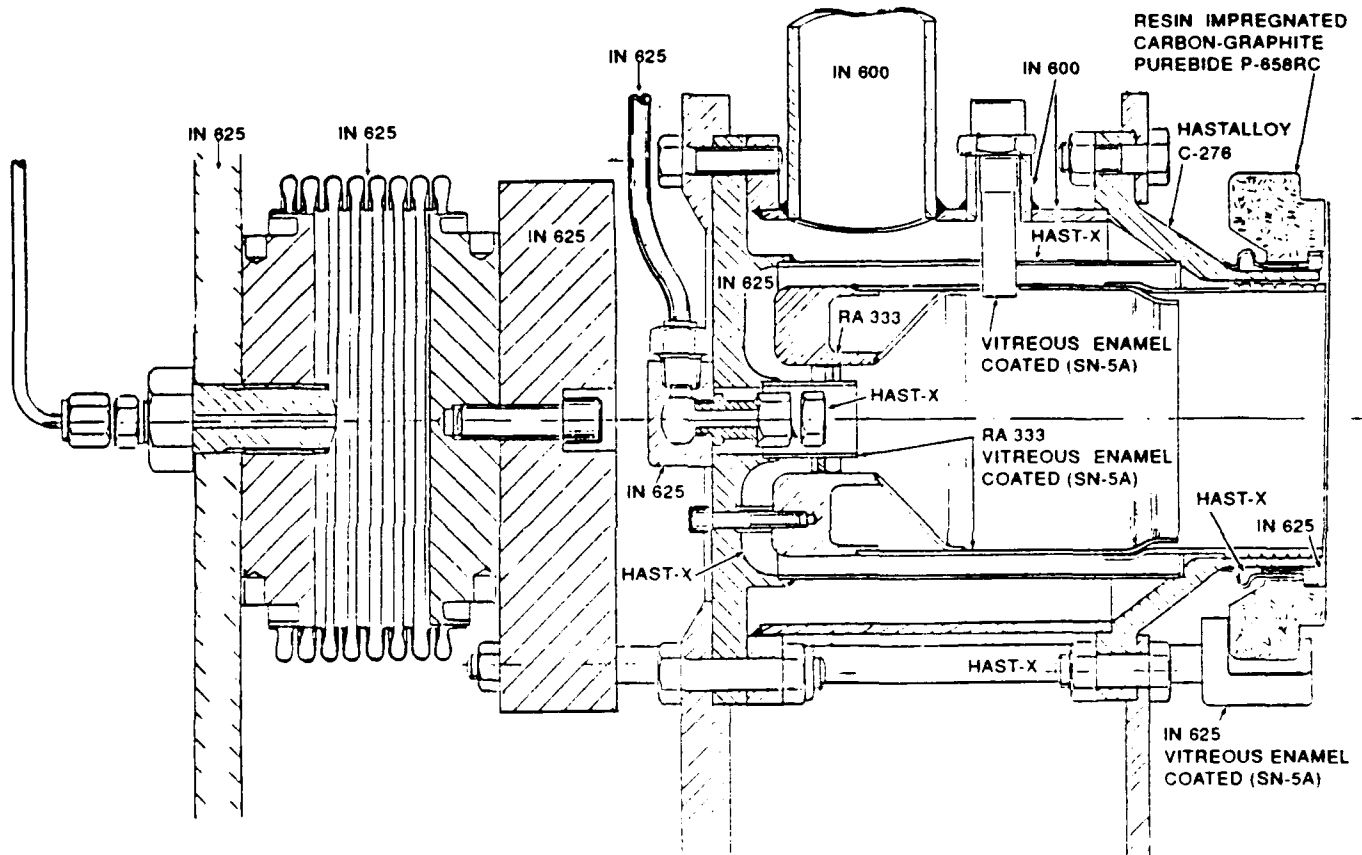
Cross-Section View of Solar Combustion Chamber Used for Water Piston Tests
